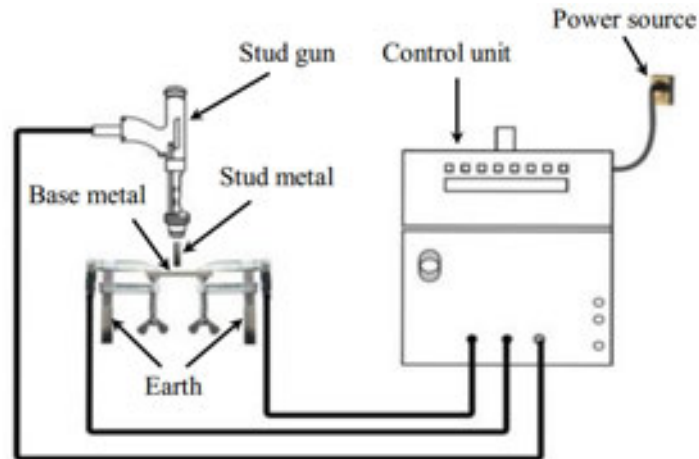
Schematic view of arc stud welding experimental setup [20]
